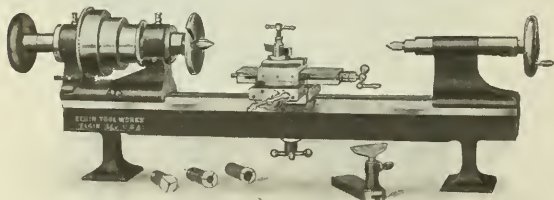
No. 4 by 5 Bench Lathe built by Elgin Tool Works
